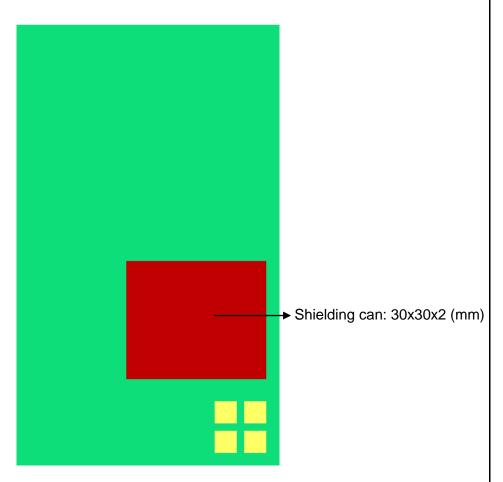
SHIELDING CAN FIXED ON REFERENCE PCB
